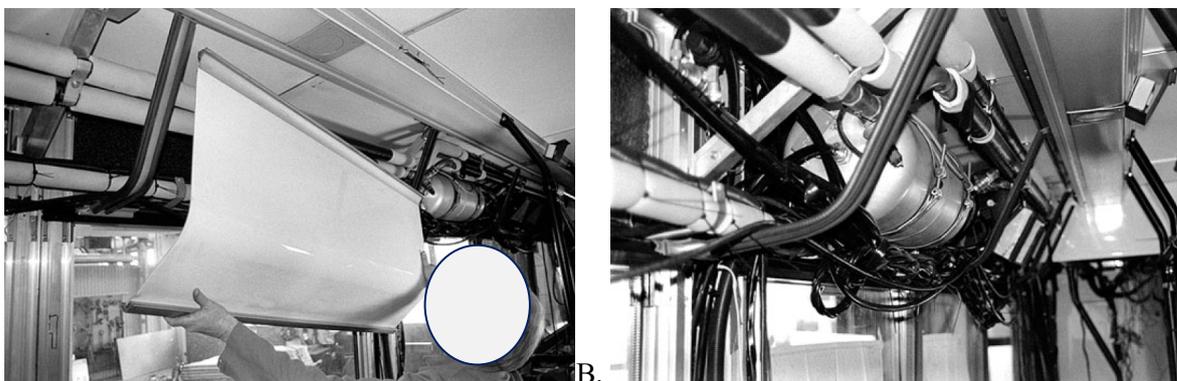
A – Removal of shelf nets and flaps; B – Removal of door mechanism, air conditioning fan, air tank and electrical wires
